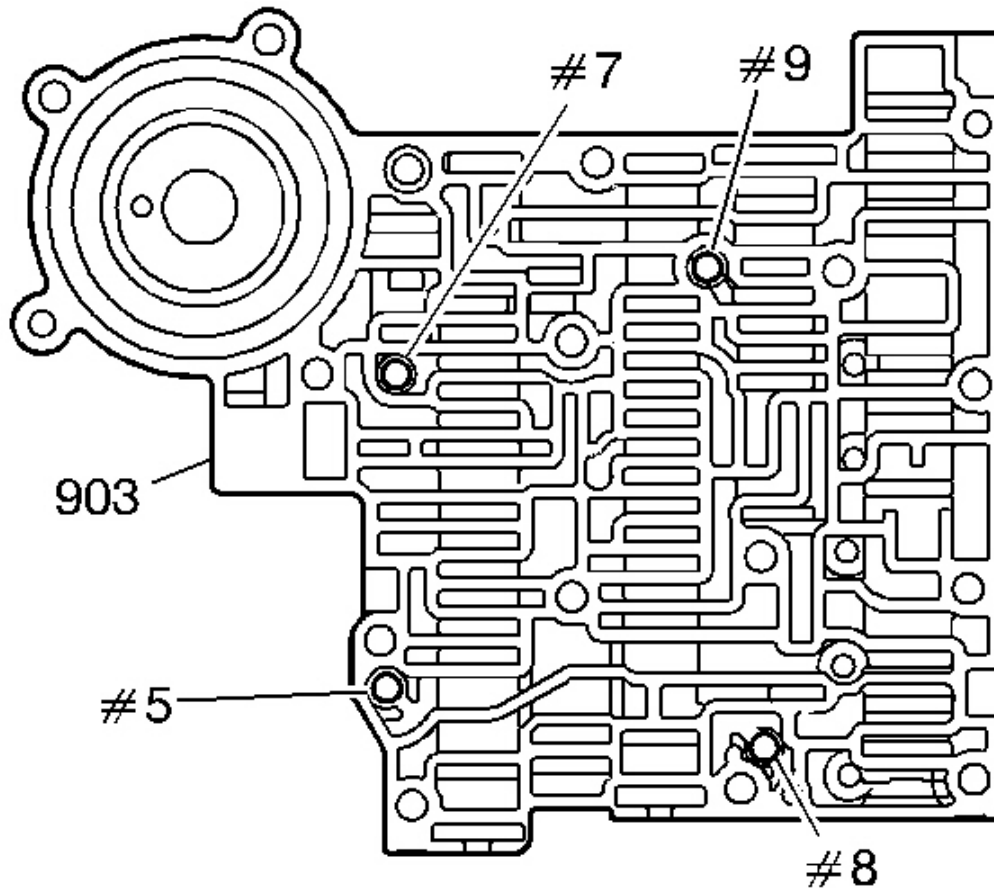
View Of Checkball Cavities In Lower Control Valve Body
